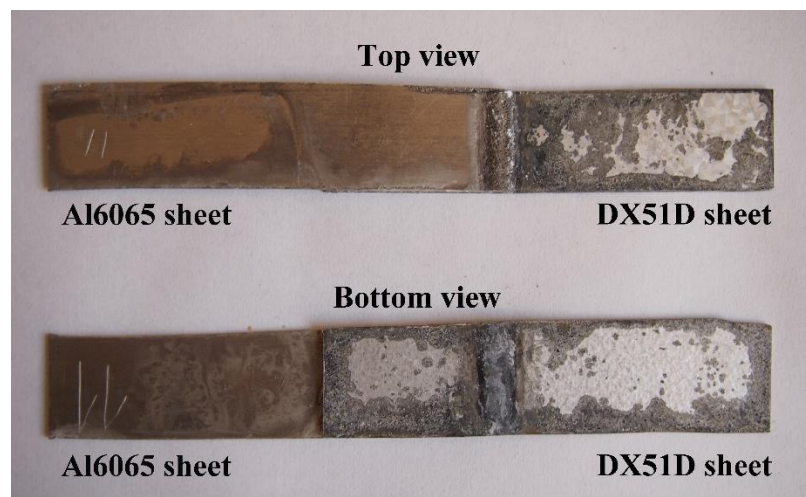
A corrosive sample of Test Weld 3 after 96 hours in salt spray chamber.
